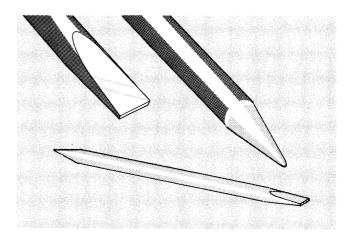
Soldering aid constructed from a 1/4-inch dowel.
